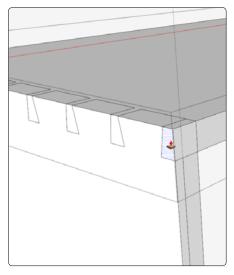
Draw guidelines for the rabbet that will hold the back panel.
